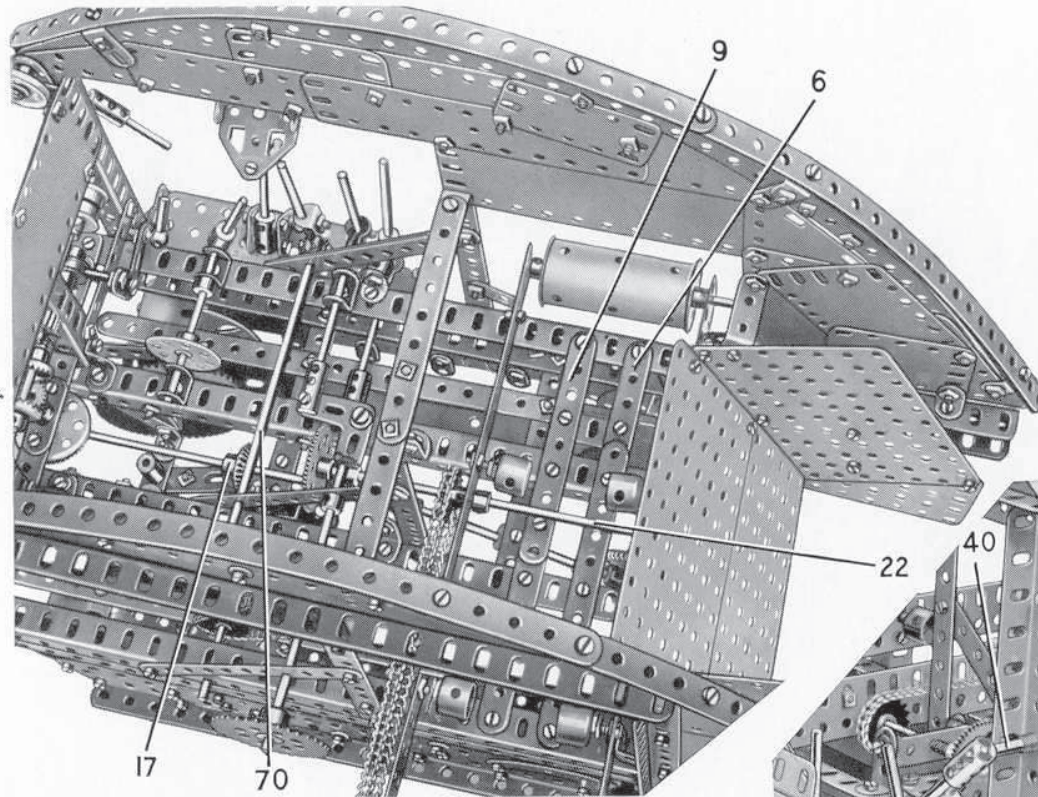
Plan view of the Trench Digger with the boom and bucket chain removed
